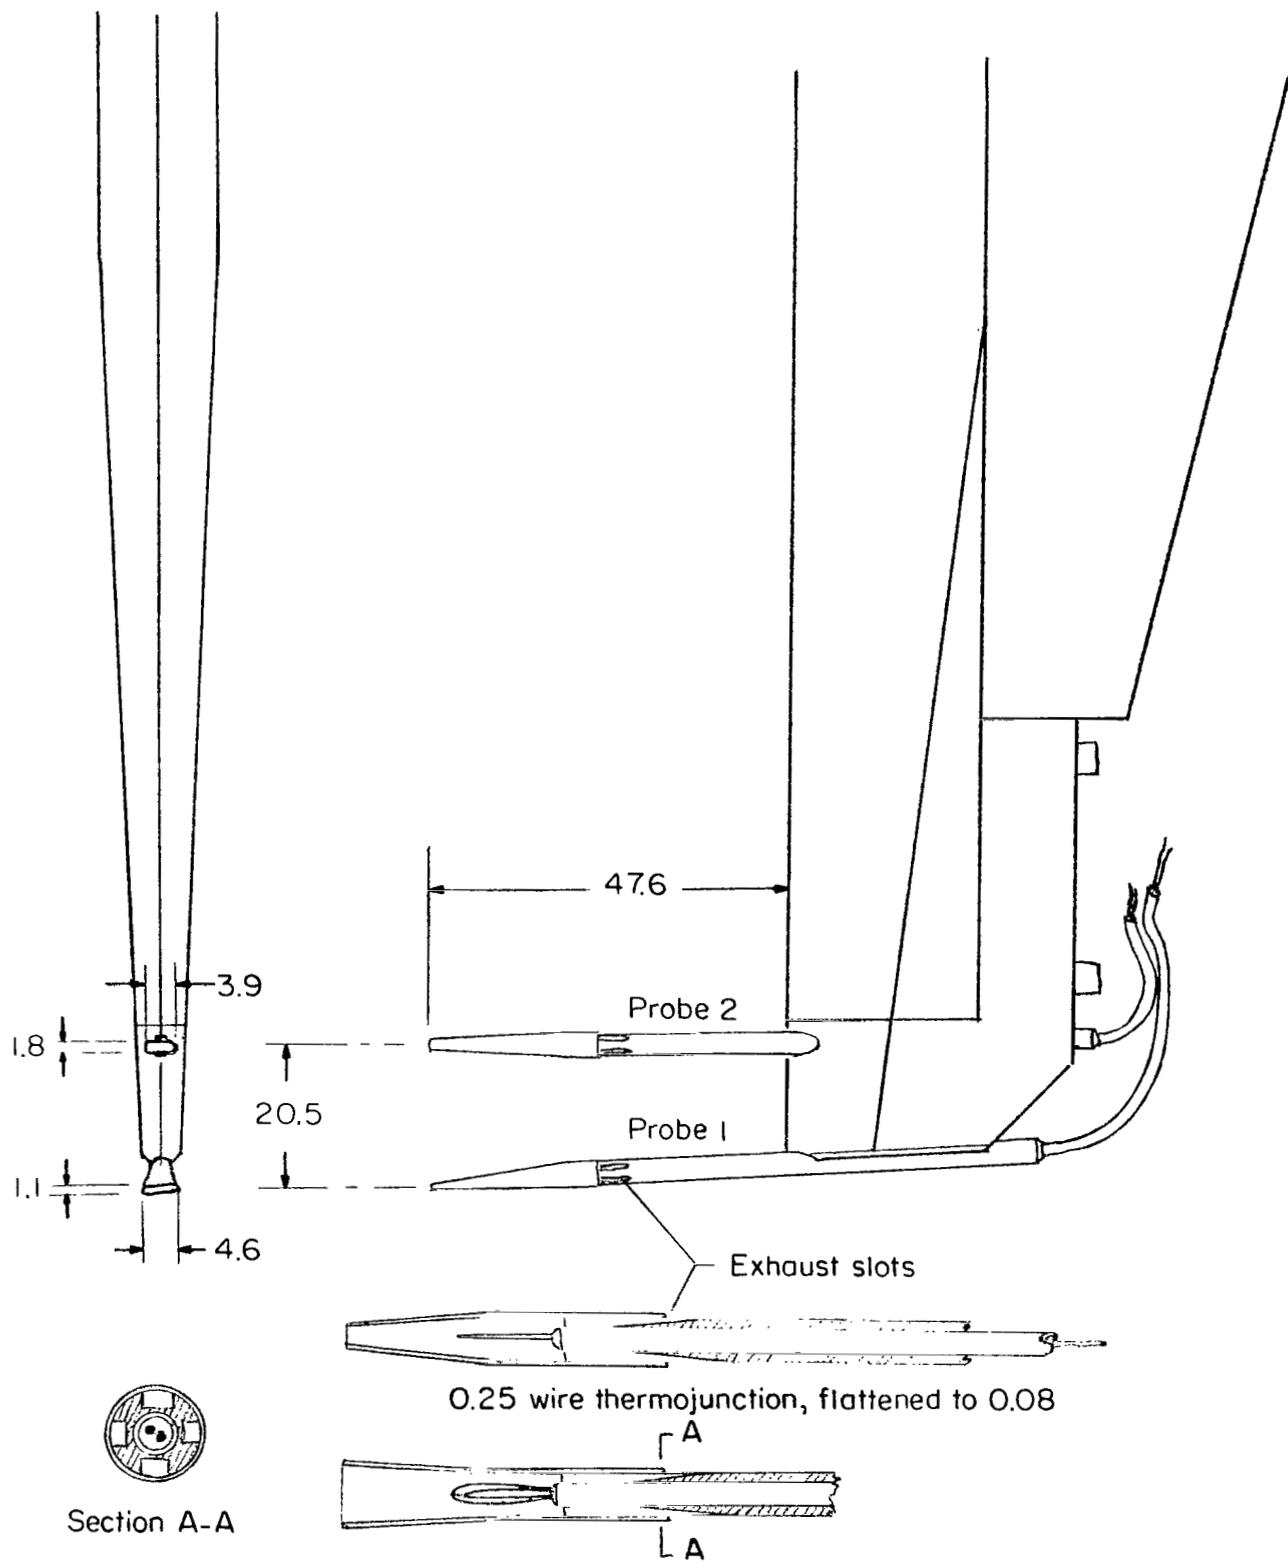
Boundary-layer rake with total-temperature probes. (Dimensions are in millimeters.)
